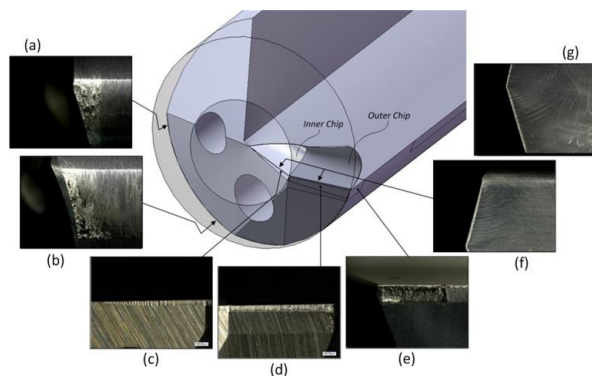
Wear regions on gun drills after deep hole drilling of Inconel-718.
